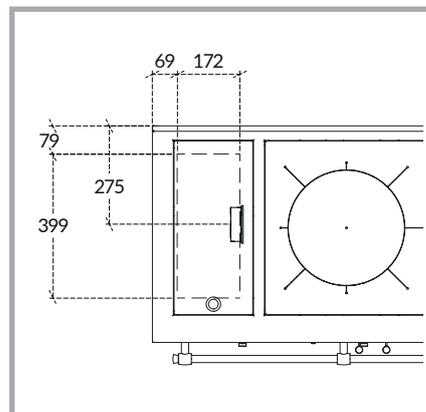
Different connections of the air intake of the wood fired thermal cooker.
